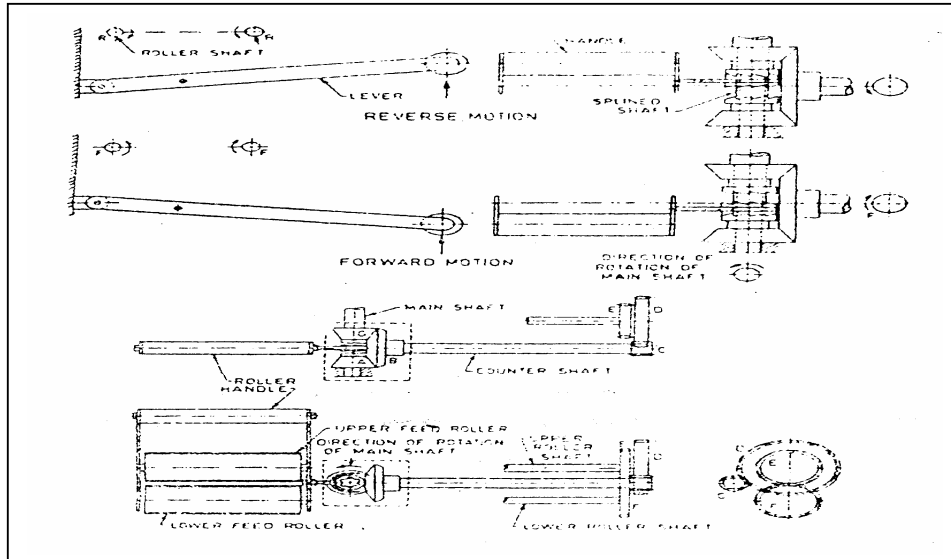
FEED REVERSING MECHANISM FOR CONVEYOR-FED CHAFF CUTTER
